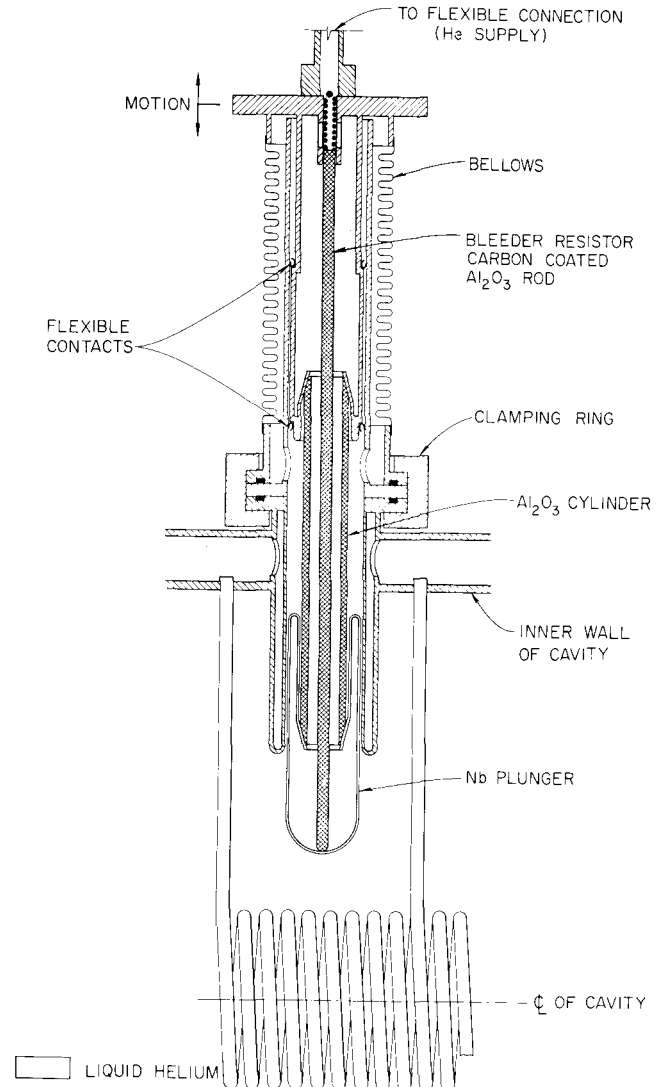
A schematic view of the proposed slow tuner. Details such as welds, some "O" rings, bolts, etc. are not shown.
